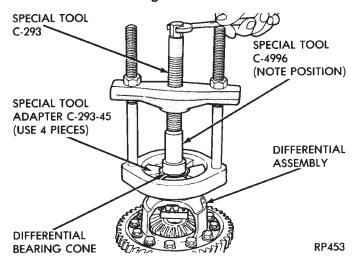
Remove Differential Bearing Cone (Front Wheel Drive)
